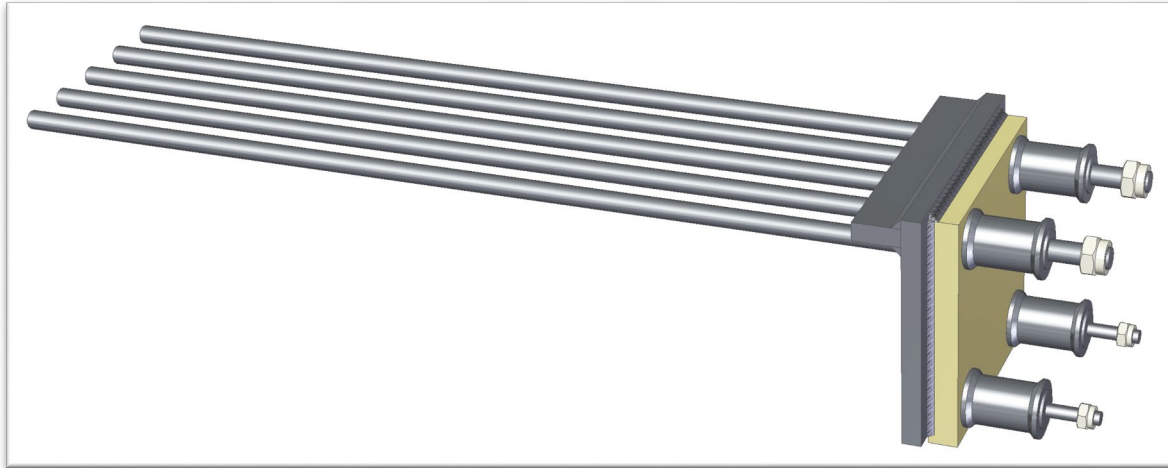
BWC 40 U-H welded to BWC Plate 40 U-H
